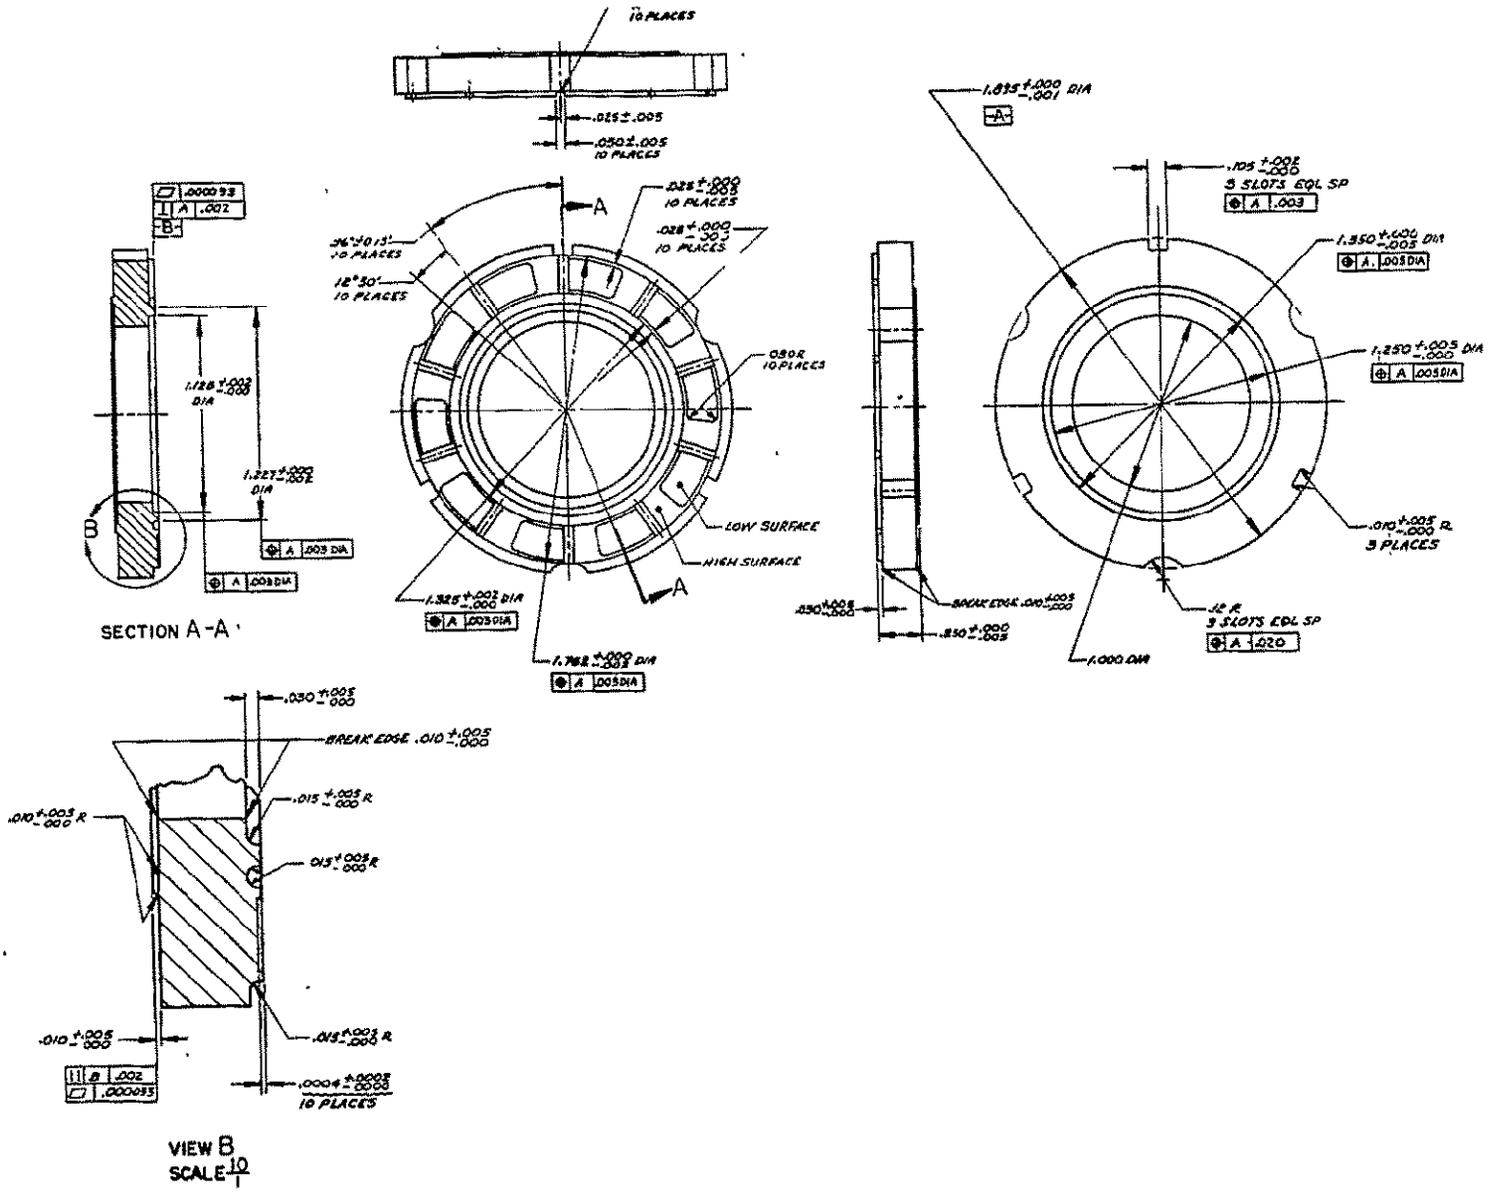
Final Rayleigh Pad LOX Seal Carbon Ring Design
